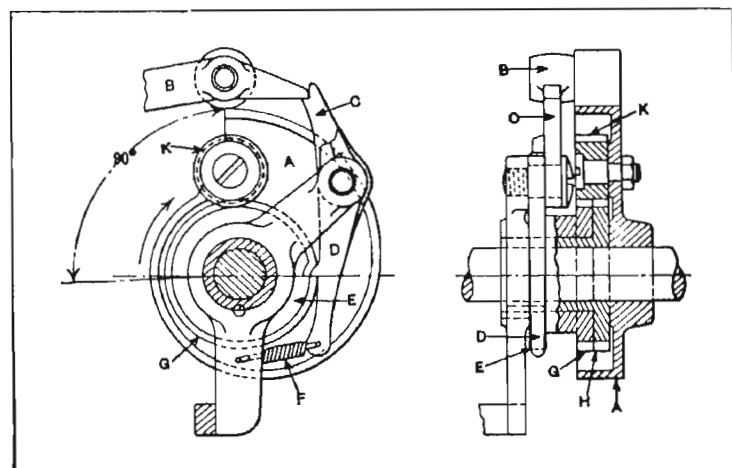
Arrangement for Varying Dwell of Cam Follower
